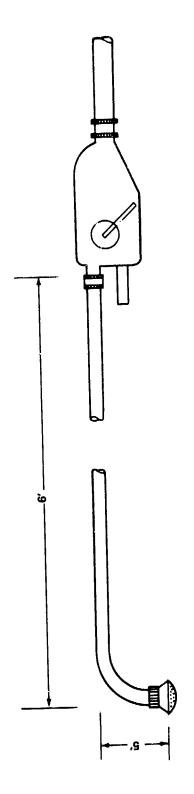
MODIFIED SHORT BEND APPLICATION USED TO EXTINGUISH BETWEEN AND BEHIND DUAL 1 IRES.
